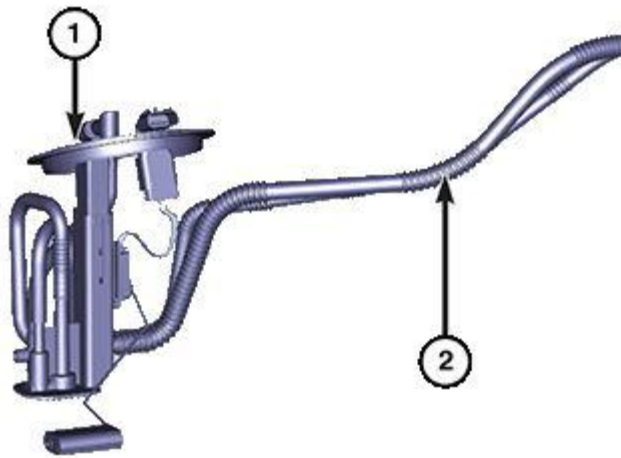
Auxiliary Fuel Pump Module & Fuel Supply And Return Line
